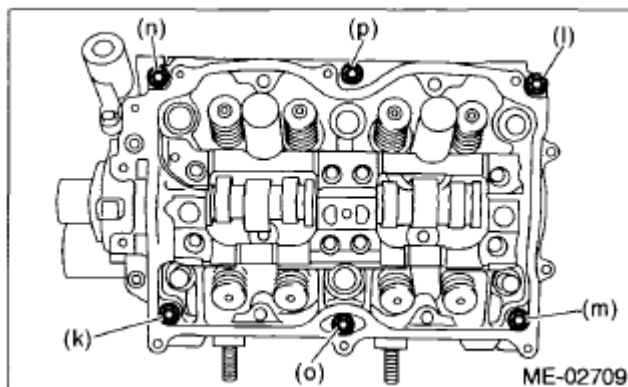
Identifying Camshaft Bolts Removal Sequence
